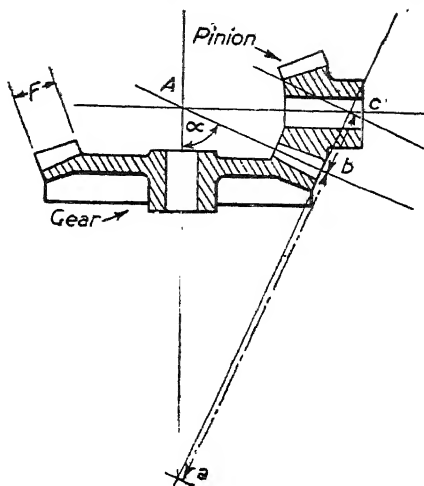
Bevel gears. Ab = Apex distance. ab = Back cone radius (gear). bc = Back cone radius (pinion). α = Centre angle.
